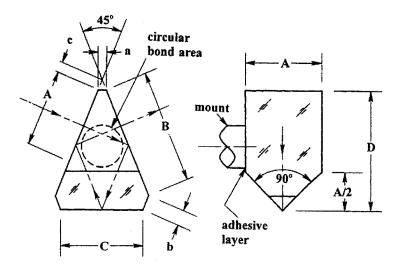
Schmidt roof prism. (For design and analysis, use File 6.21 of the CD-ROM.) a = 0.1A = 0.150 in. (3.810 mm); b = 0.185A = 0.277 in. (7.041 mm); c = 0.131A = 0.196 in. (4.980 mm); B = 1.468A = 2.202 in. (55.942 mm); C = 1.082A = 1.624 in. (41.239 mm); D = 1.527A = 2.291 in. (58.194 mm); $t_A = 3.045A = 4.568$ in. (116.022 mm); $V = 0.863A^3 = 2.913$ in.³ (47.729 mm³); $W = V\rho = 0.265$ lb (0.120 kg); $Q_{MIN} = V\rho a_G f_S/J = 0.008$ in.² (5.161 mm²); $Q_{MAX c} = 0.318A^2 = 0.715$ in.² (461.612 mm²).
